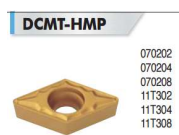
Korloy DCMT-HMP, NC 5330 internal hole turning diamond insert [22]
